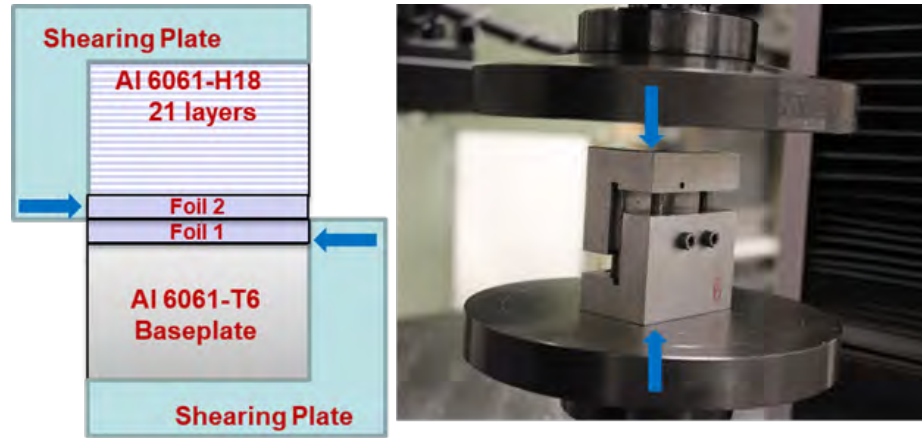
The shear testing rig used with compression platens in an MTS load frame used to test the foil–foil weld strength in shear.
